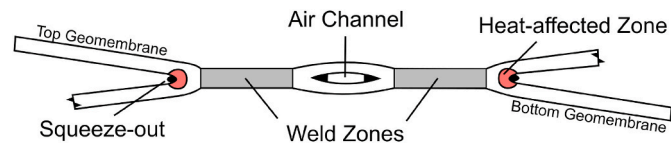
Typical seam cross section produced by a dual-track wedge welder. The two weld zones are areas where sheet is forced together by the welding machine, providing the structural integrity for the seam. One center air channel, used as a non-destructive means of testing the seam through pressurization. Two heat-affected zones on either extremity of the seam. These areas exhibit the same thickness as the virgin sheet but are subjected to relatively high temperatures during seaming. Lastly, two squeeze-out beads on either extremity, in direct contact with two heat-affected zones.
